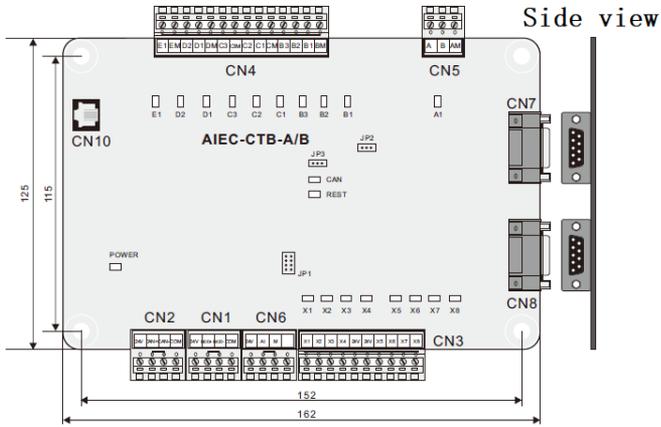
Appearance and dimensions of the CTB (unit: mm)
